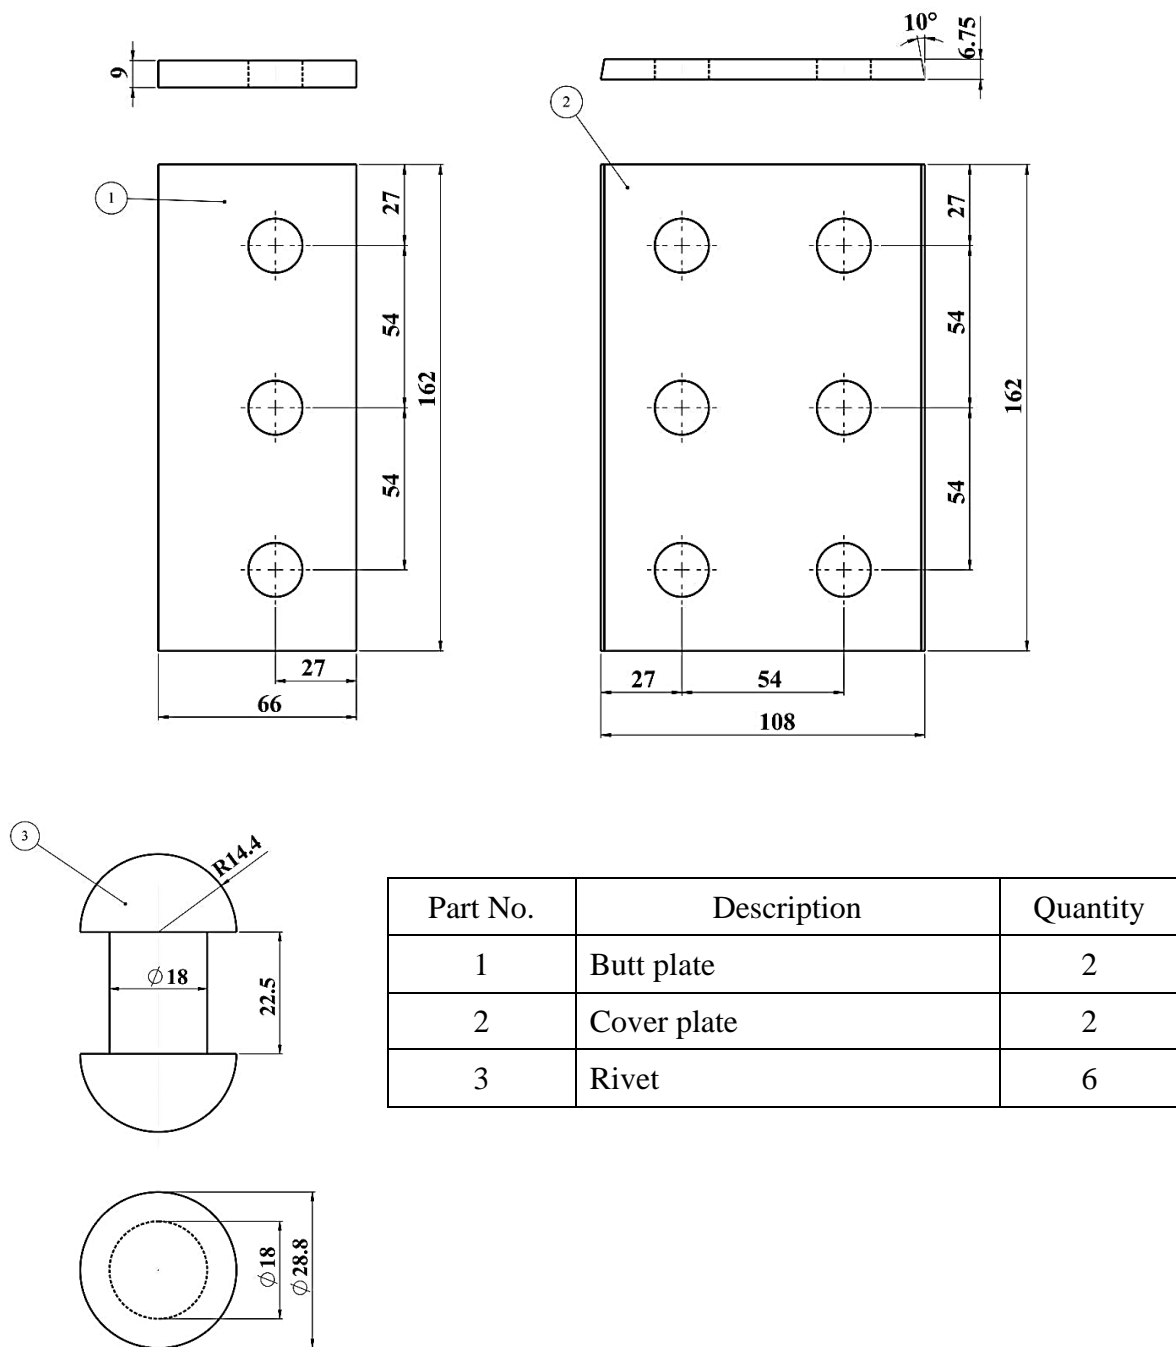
Part drawings of Single riveted butt joint with double cover plate.
